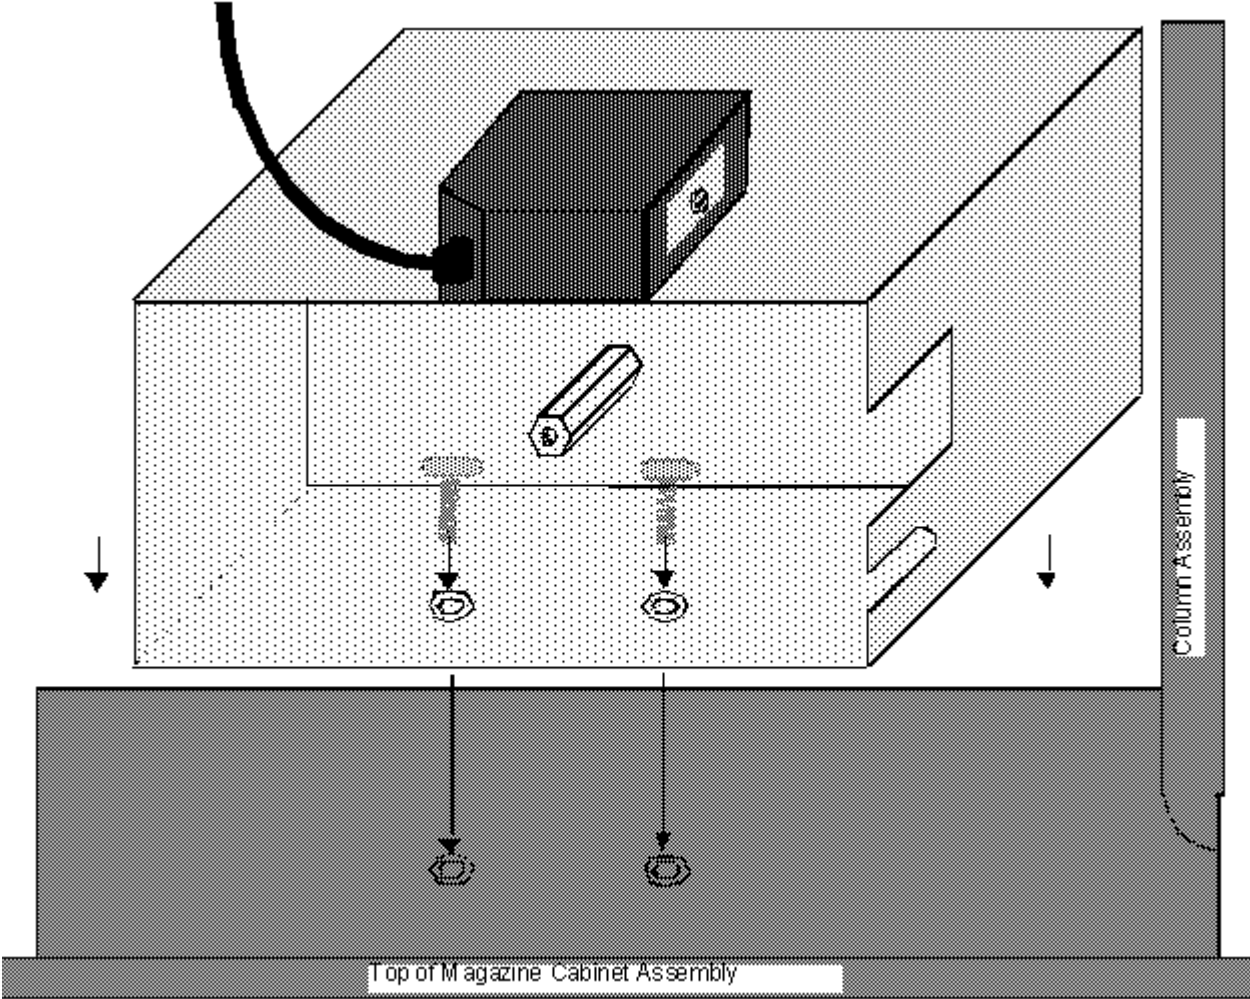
Mounting the Light Barrier Cabinet on the Cabinet Assembly
